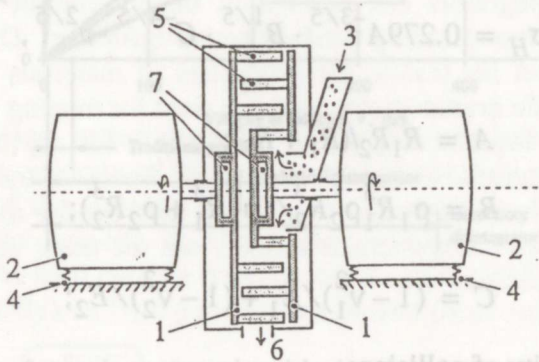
Disintegrator. 1 – rotors, 2 – electric drives, 3 – material supply, 4 – elastic beds, 5 – grinding elements, 6 – output, and 7 – adaptive controller.
